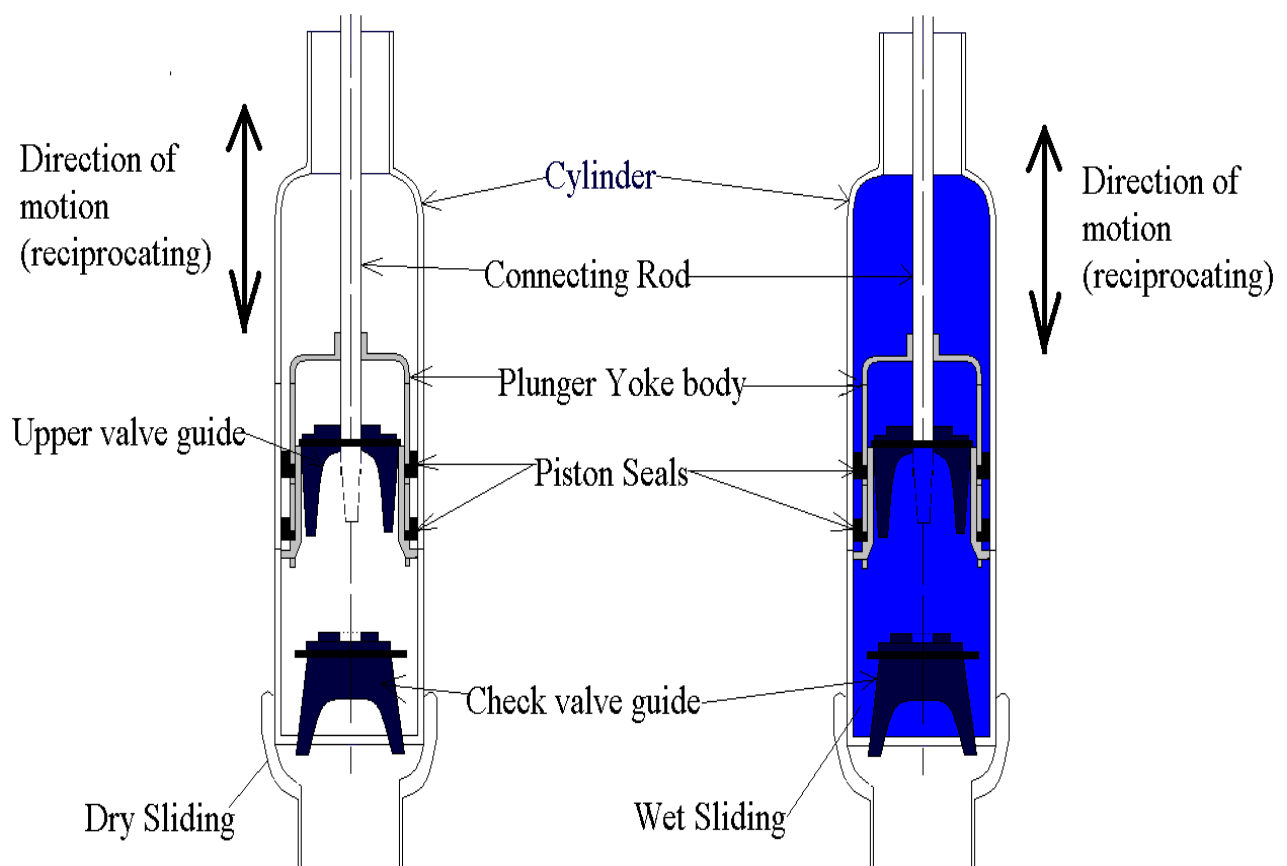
Schematic of dry and wet sliding in the cylinder assembly
